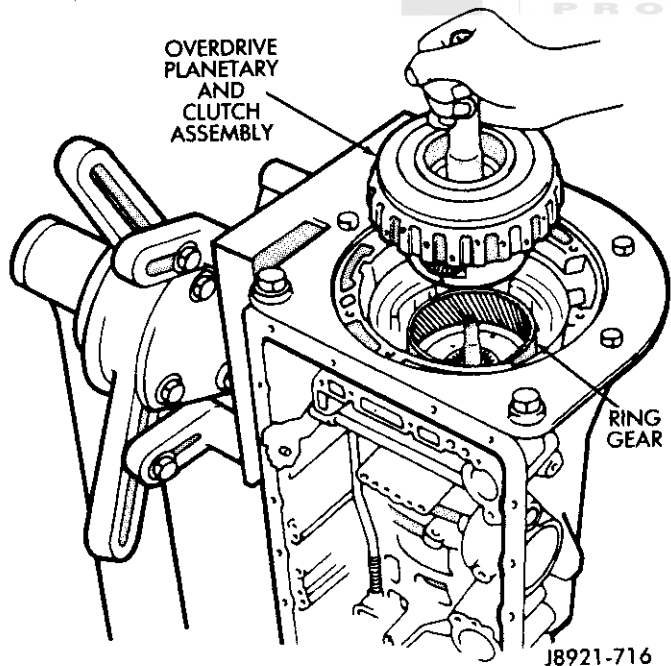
Installing Overdrive Planetary And Clutch Assembly
